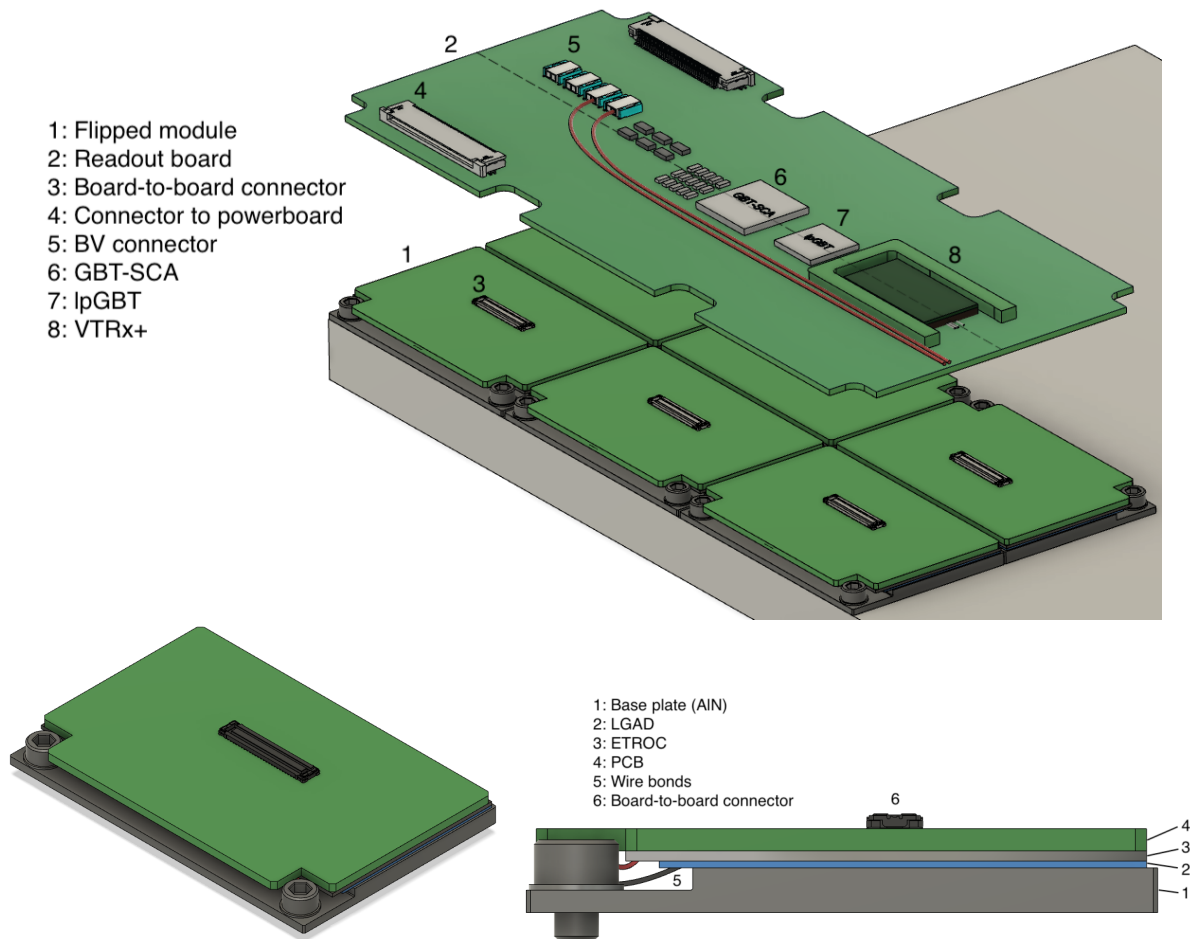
Top: Partially exploded views of the module-RB sandwich showing its various components. Bottom: View of a half module in the flipped configuration, with the LGAD sensor below the ETROC.
